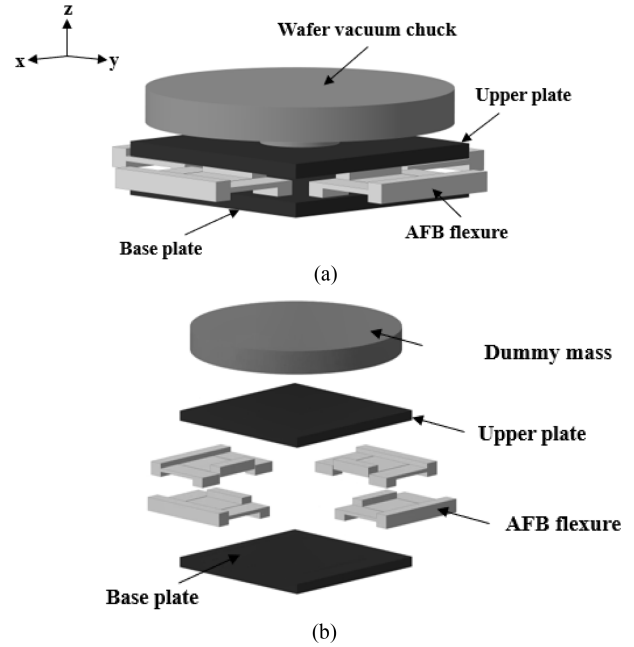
(a) 3D model of the aligner with AFB flexure (b) Exploded view of the aligner
